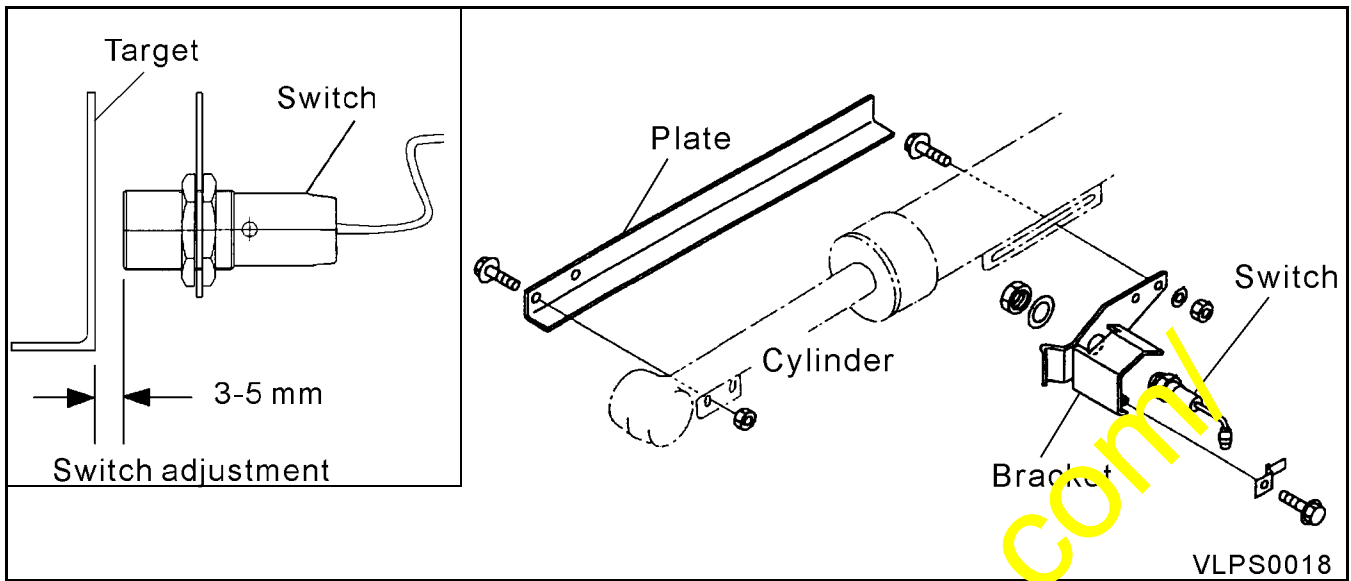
Typical Bucket Switch Mounting (VA250-3L)
